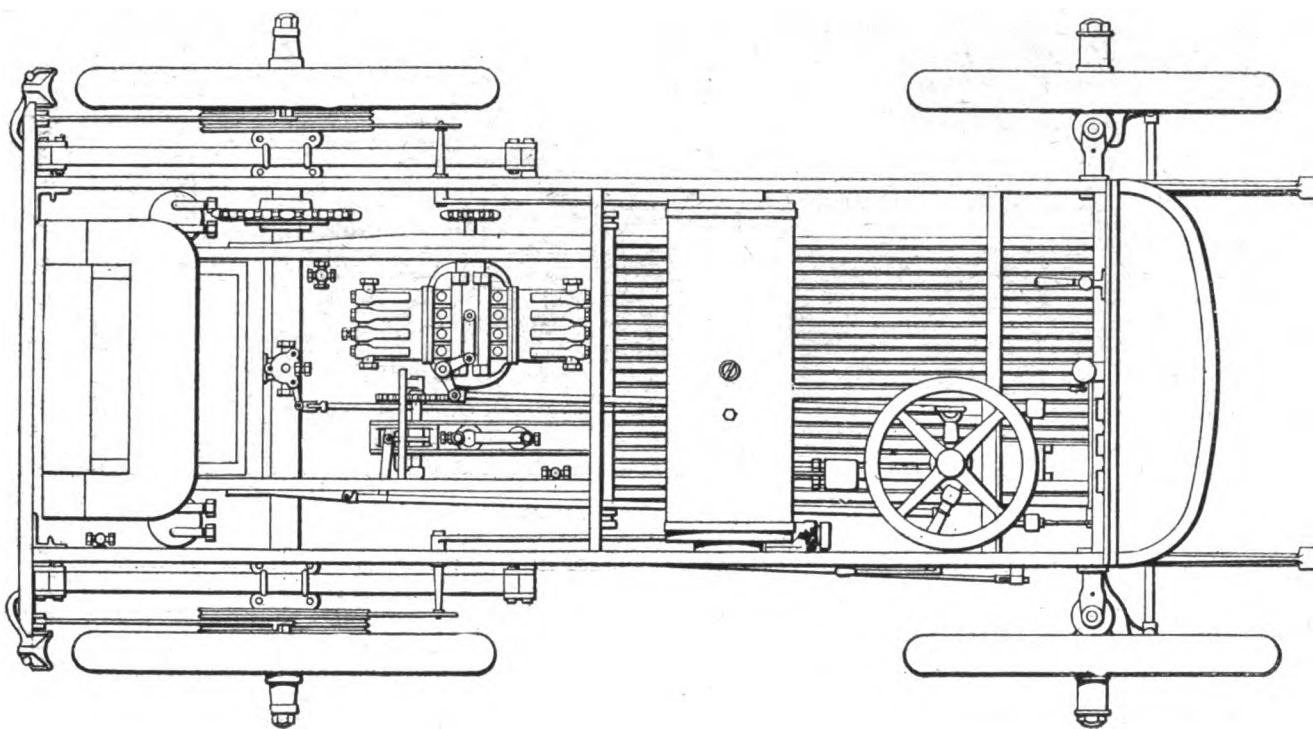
PLAN OF GARDNER-SERPOLLET STEAM CAR.
